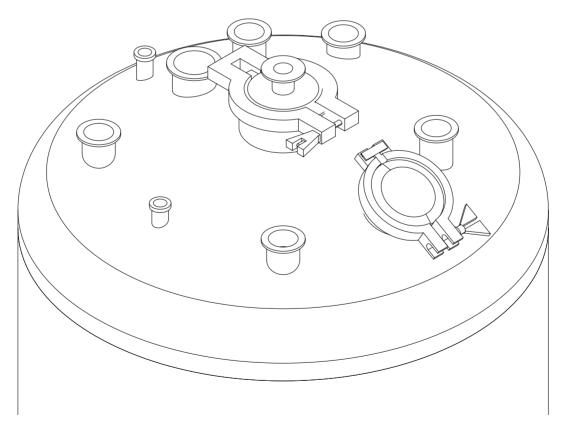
Test Vessel Head with Tri-Clover Pt3 Flanged Connections
